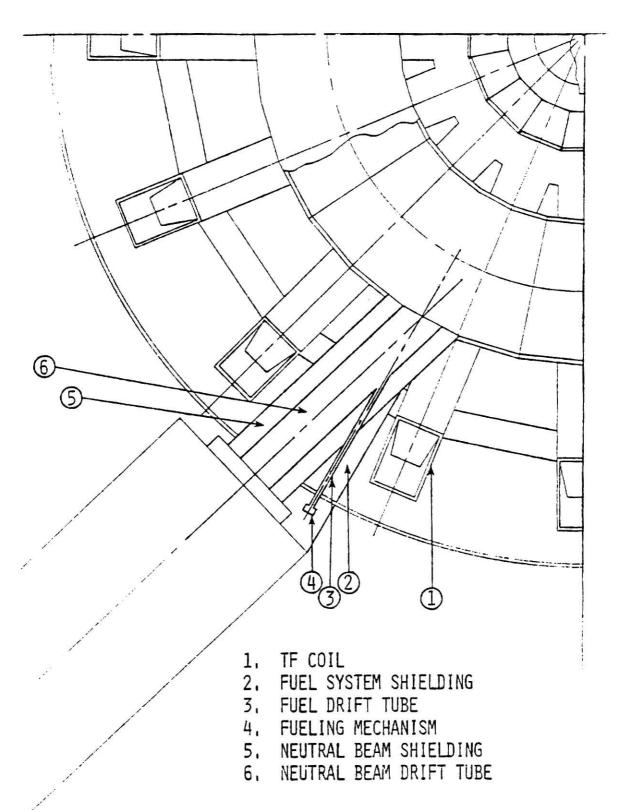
Closeup view of incorporation of pellet injector into CTHR.
